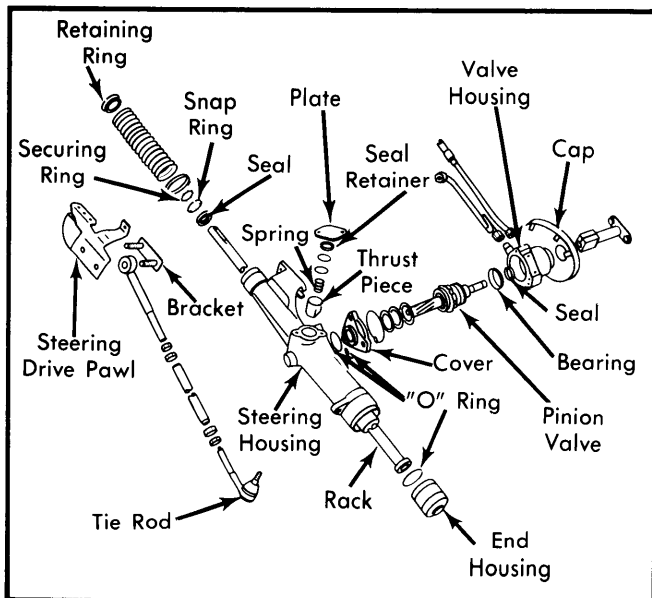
Audi 4000 Power Steering Gear Exploded View
